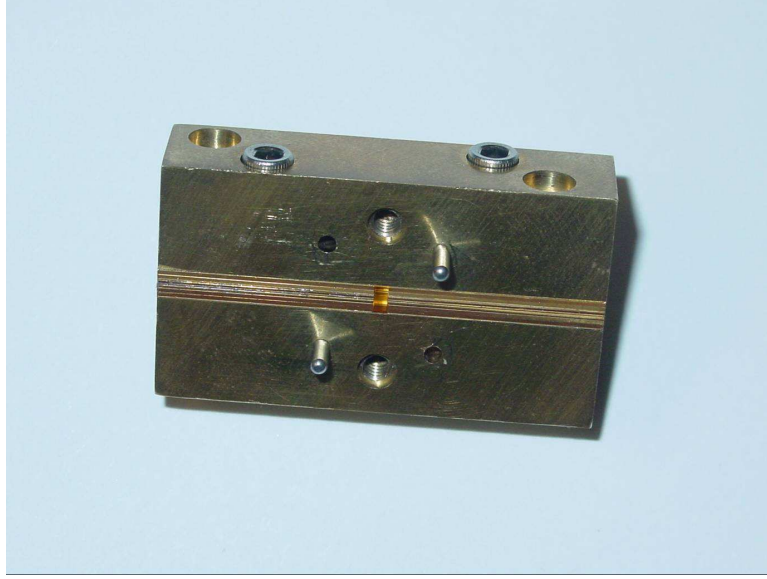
A photograph of the assembled measurement fixture with the six silicon layers installed.
